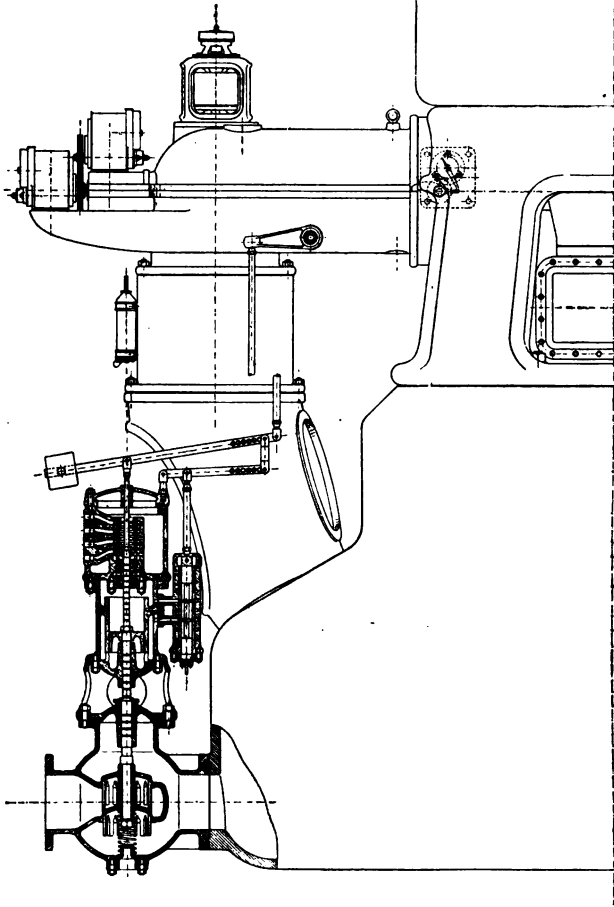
Section through governing mechanism attached to the gas turbine.
